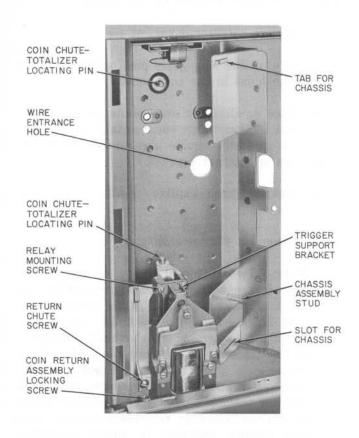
Housing & Mounting Plate Assembly (Typical)
